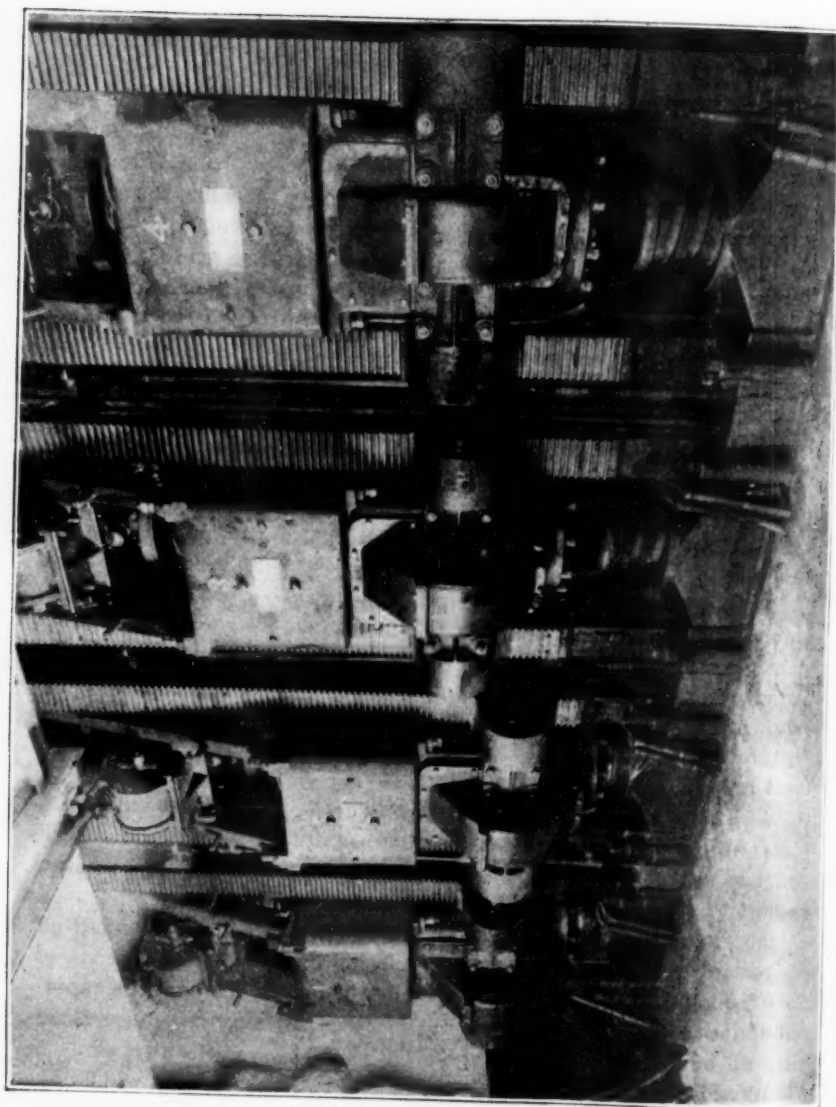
VIEW IN DIRECTION INDICATING FOUR MAJOR MACHINERY
